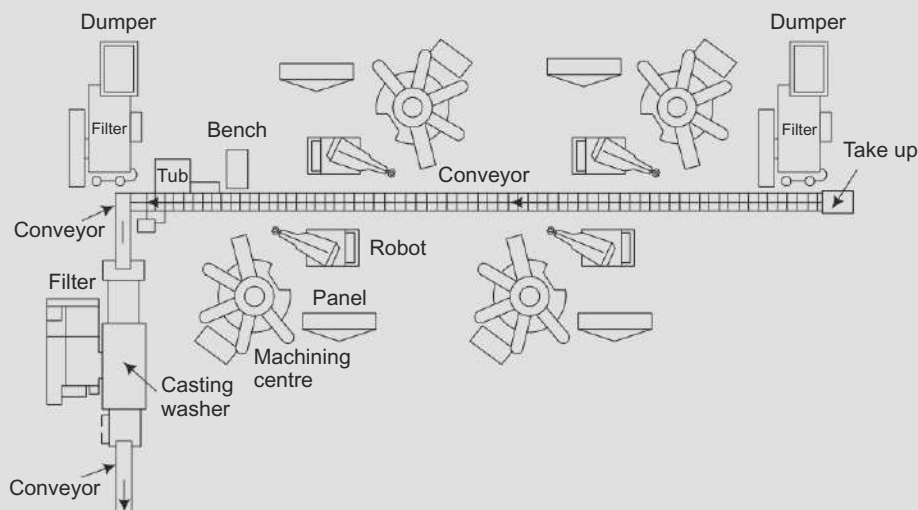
A typical machining cell with a number of milling machines with robots and a conveyor
